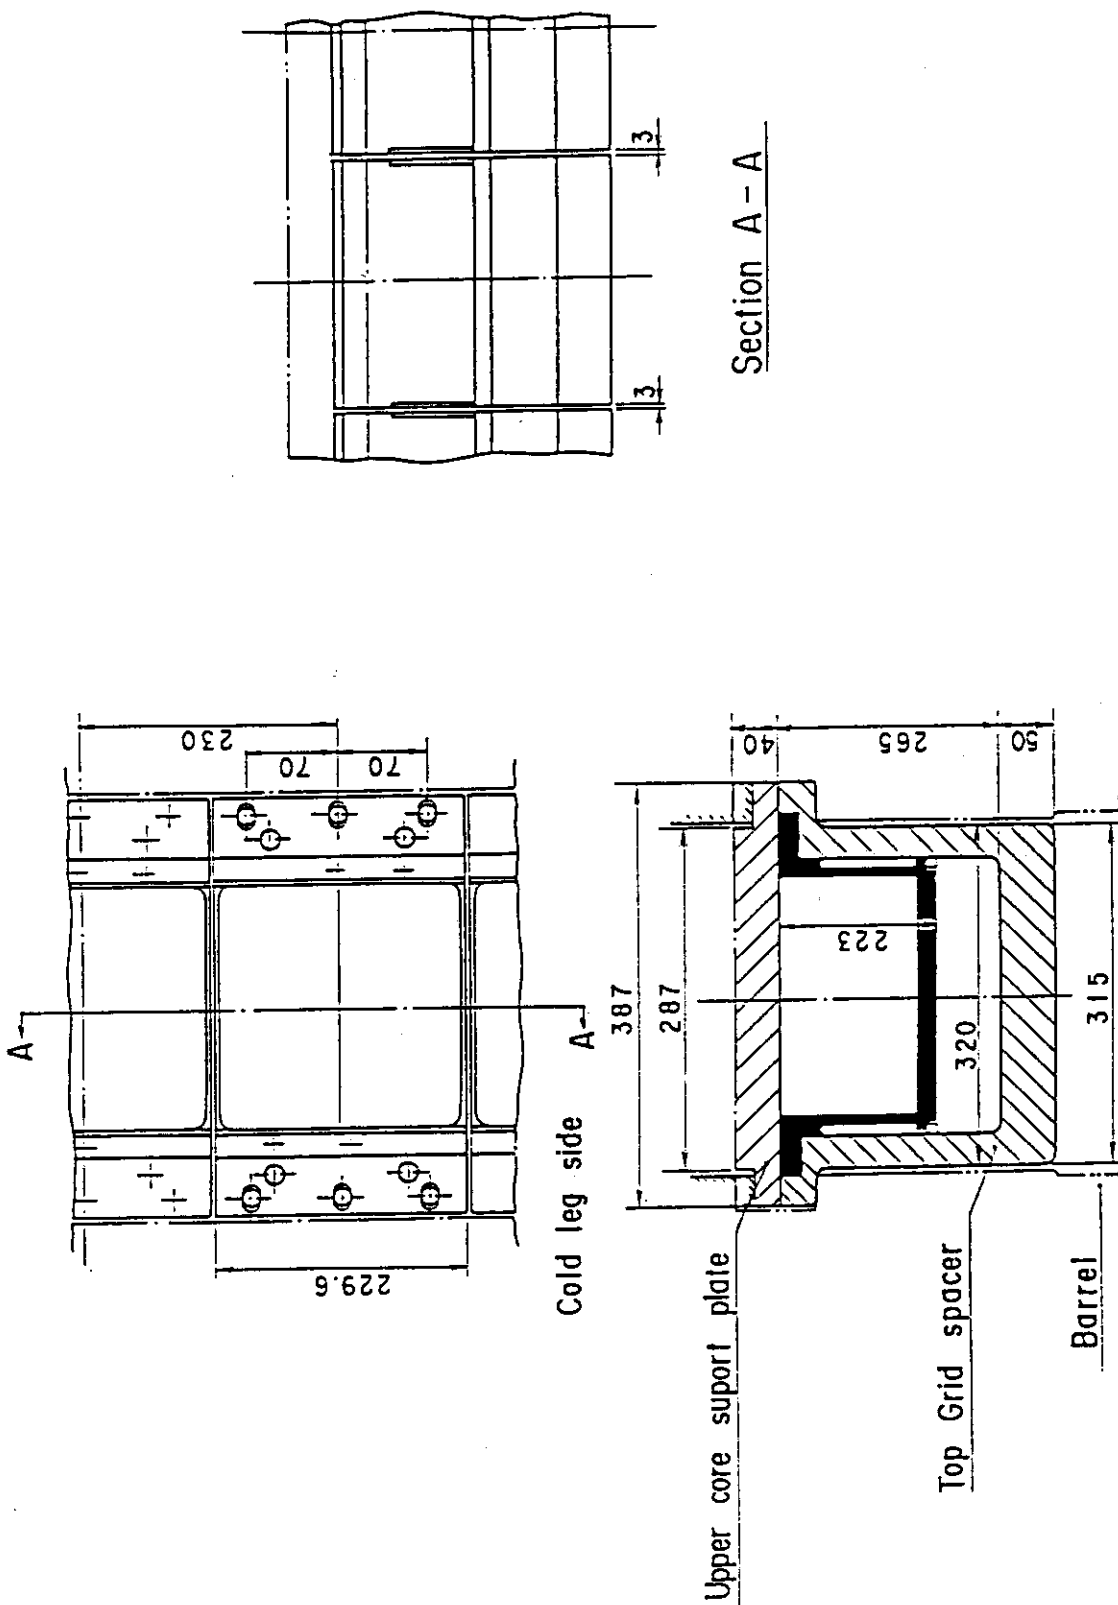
Arrangement and principal dimension of end boxes and top grid spacers
